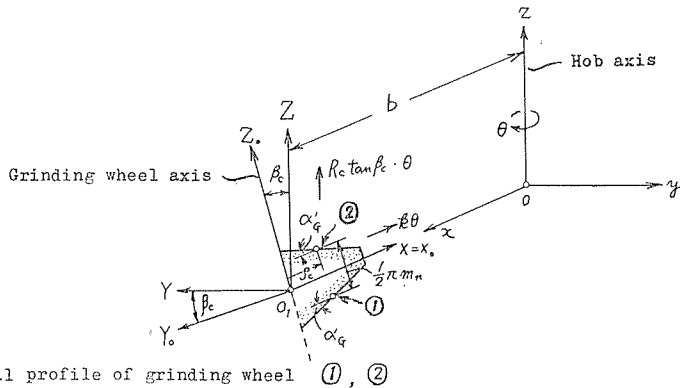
Grinding method of side tooth flank of hob by grinding wheel
